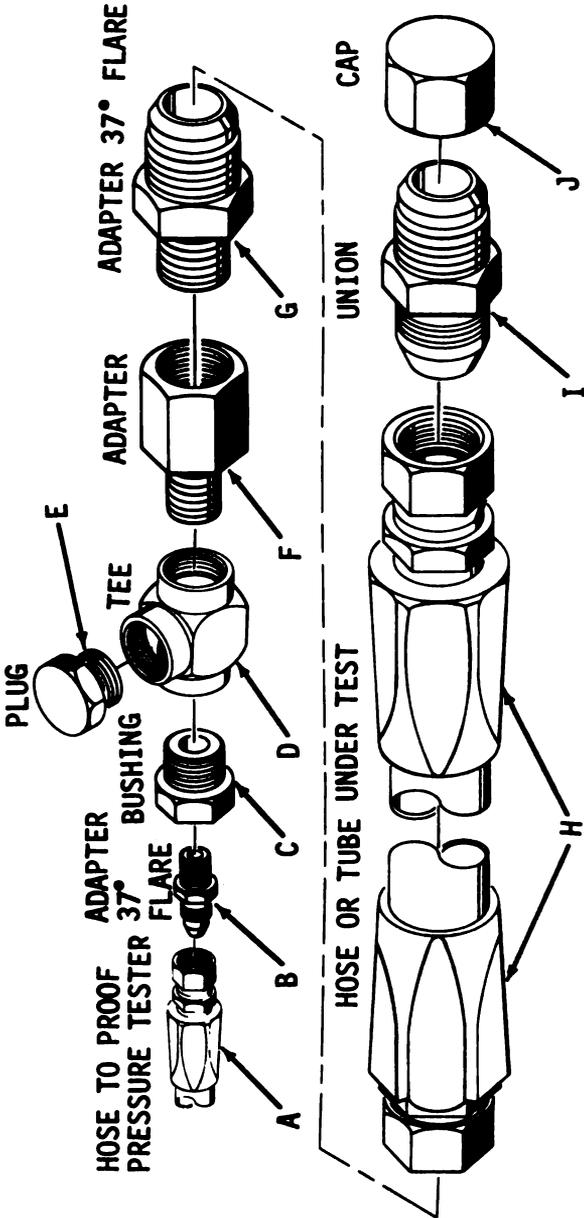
Connecting a 37 Degree Flare Hose or Tube Assembly to the Proof Pressure Tester.
